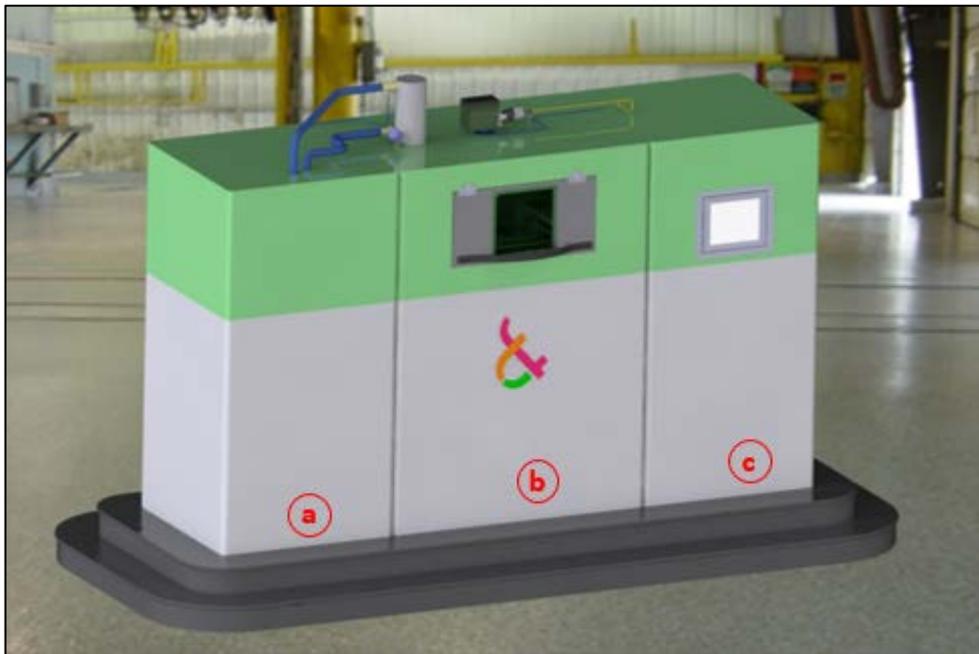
The machine showing different units a) The powder and filter unit b) The central unit c) Laser and control unit.
